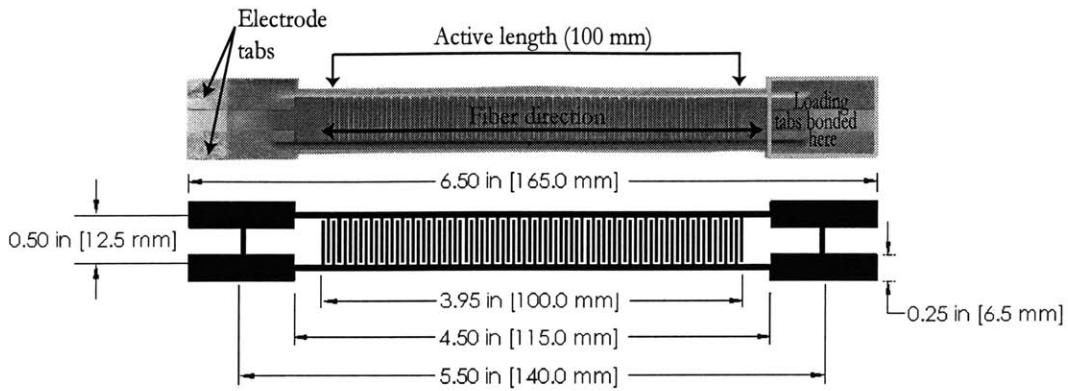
Dimensional drawing and a picture of a narrow AFC test coupon
